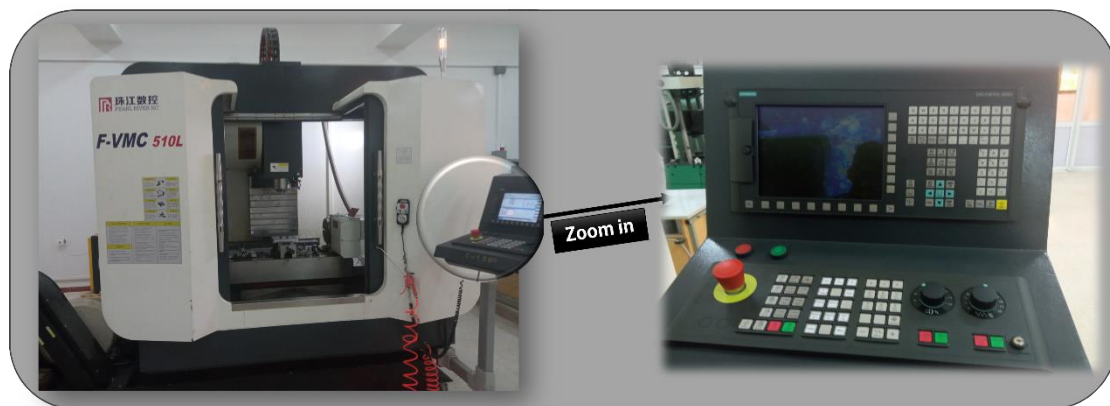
Pearl River F-VMC 510L Vertical Machining Center with Integrated Coolant Nozzles.
